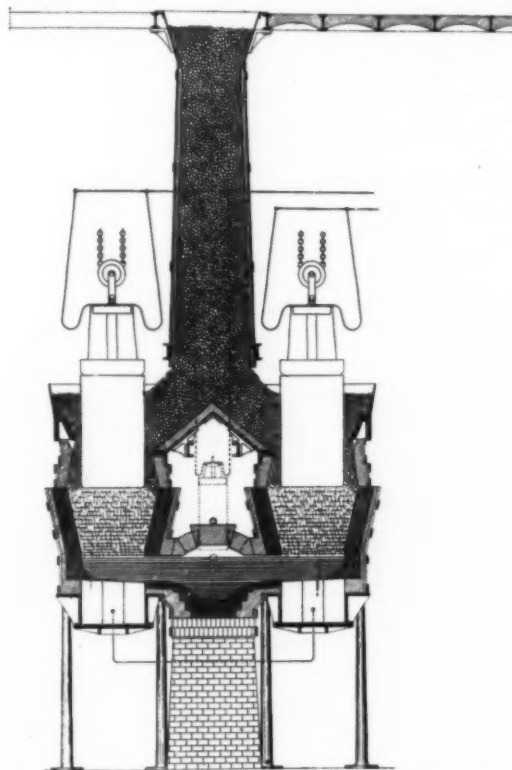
IMPROVED FURNACE FOR MELTING PIG IRON.
